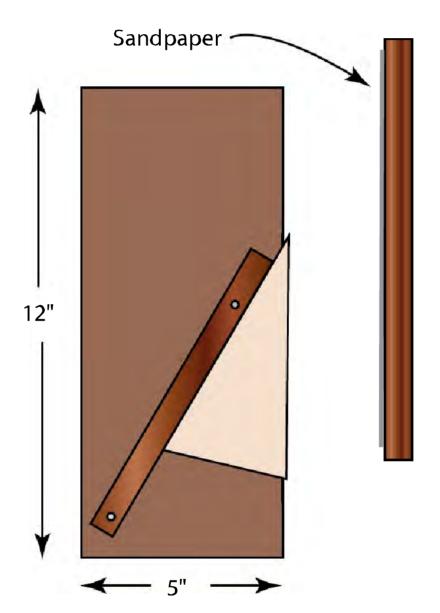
Cut the 30° Wedges. Remove a 15° cutoff and use the plastic wedge to cut 13 pieces.
